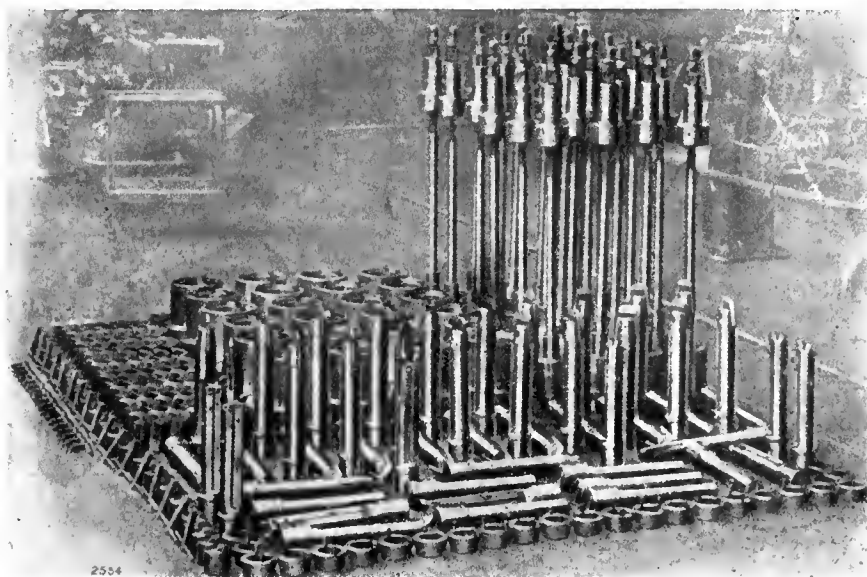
SPECIAL TOOLS AND CHUCKS FOR BORING CO-PDR. HIGH EXPLOSIVE SHELLS ON ALFRED HERBERT NO. 3 HEXAGON TURRET LATHES.
